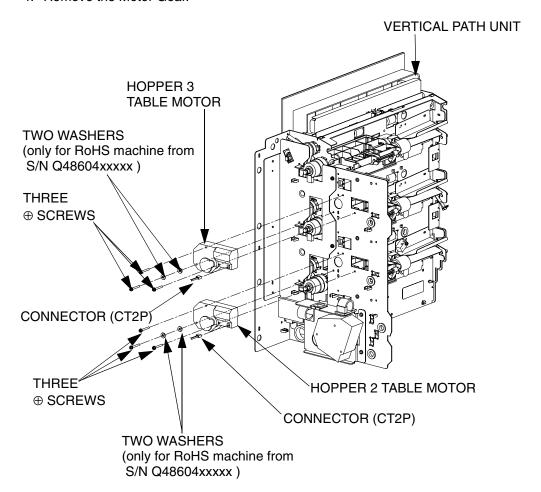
Removal of the Hopper 2/3 Table Motor
